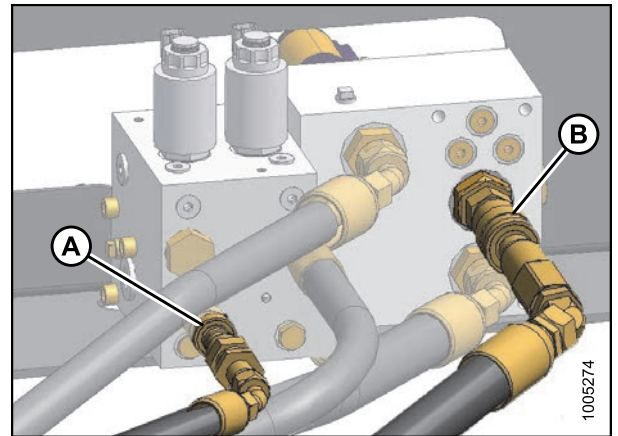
M150/M155/M155E4 without Reverser Valve
